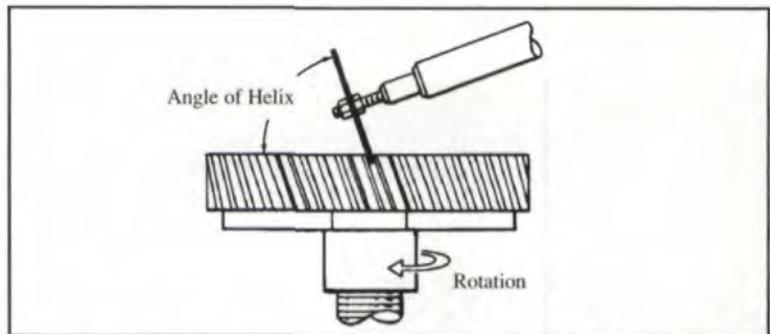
The grinding wheel angle must match the helix angle of the gear tooth.
